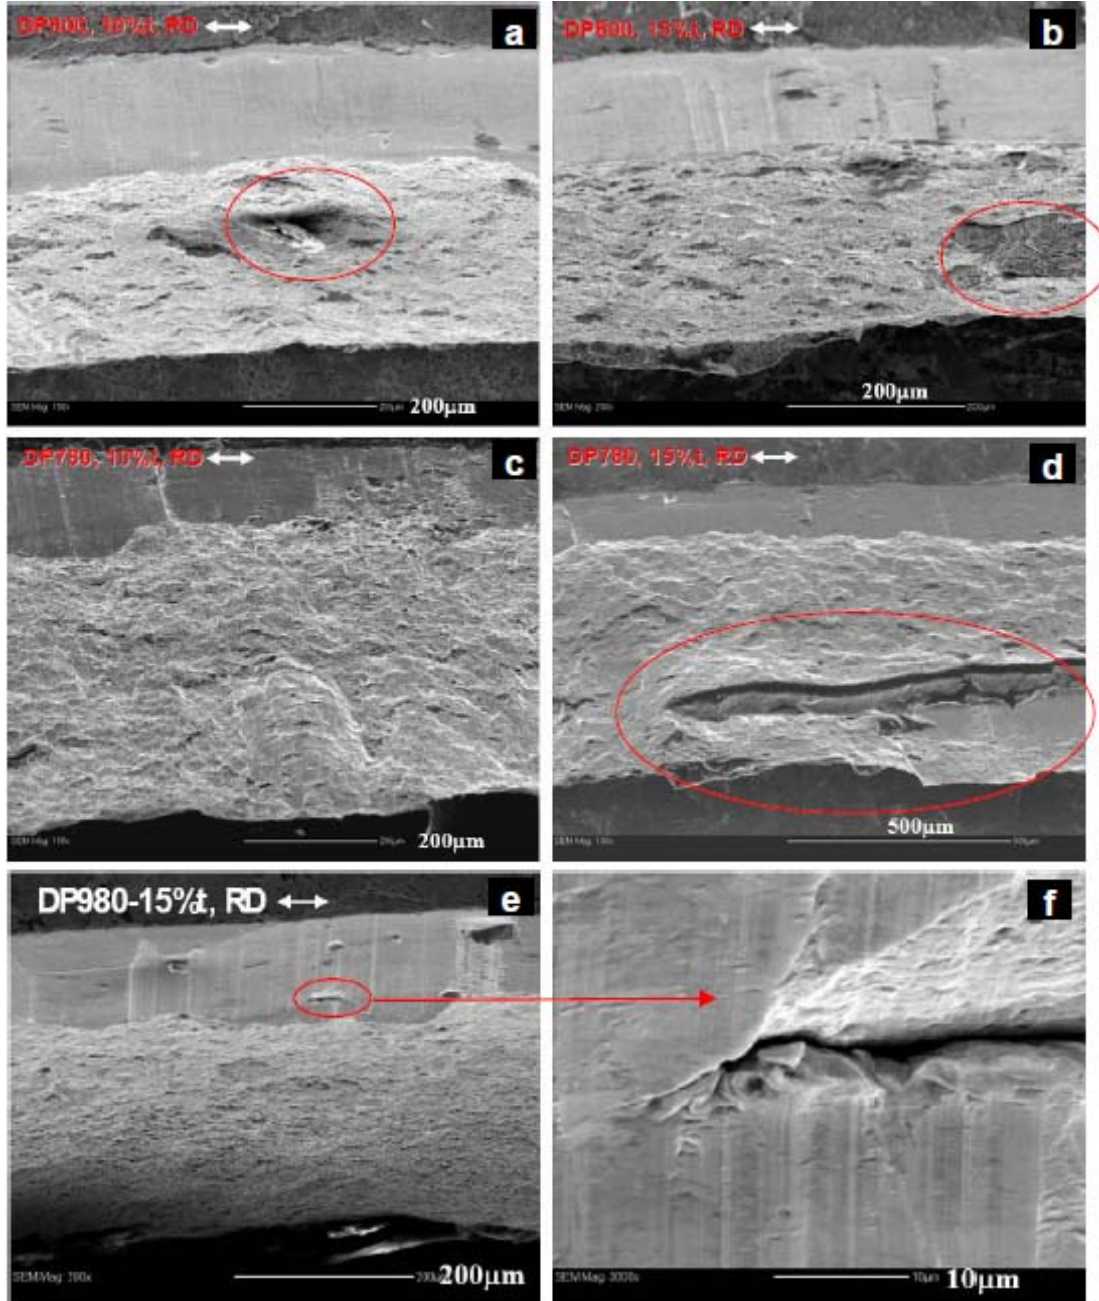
Some examples of sheared edge surfaces: 10%t clearance (a, b) tends to give larger burnish zone than 15%t (c, d); and within burnish zone there are many cracks not fully developed to the final main crack (e and its local enlargement in f).
